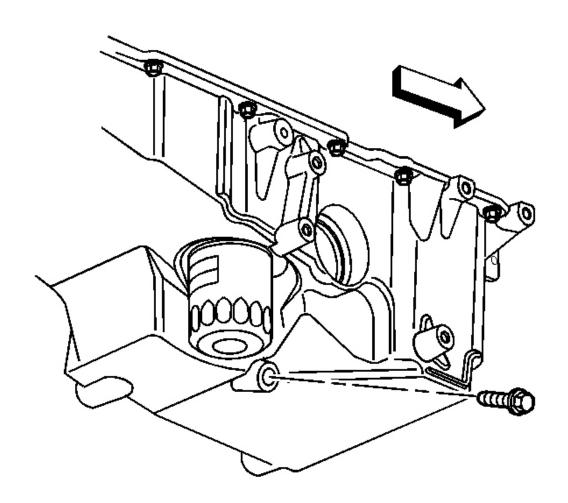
View Of Oil Pan Drain Plug Courtesy of GENERAL MOTORS CORP.
